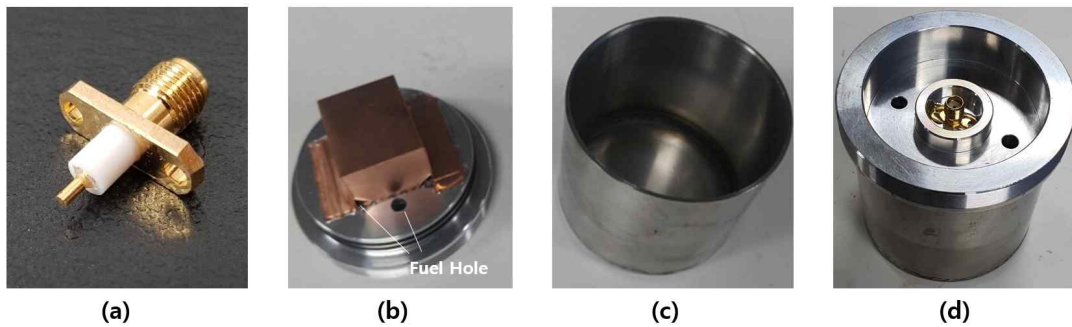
Manufactured sensor and tank. (a) Monopole, (b) Rectangular Cavity Sensor enclosure, (c) Fuel Tank, (d) Assembled form.
